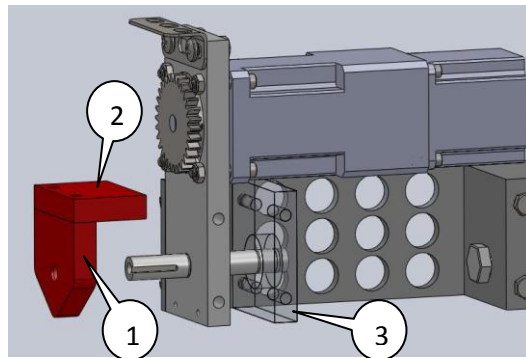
Top pelvis mount - removed and replaced by second bearing carrier (shown in phantom)
